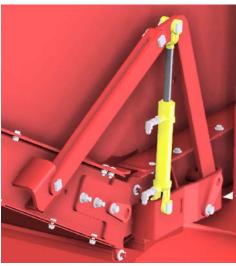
Assembled Hydraulic fold Linkage (Viewed From Front)
